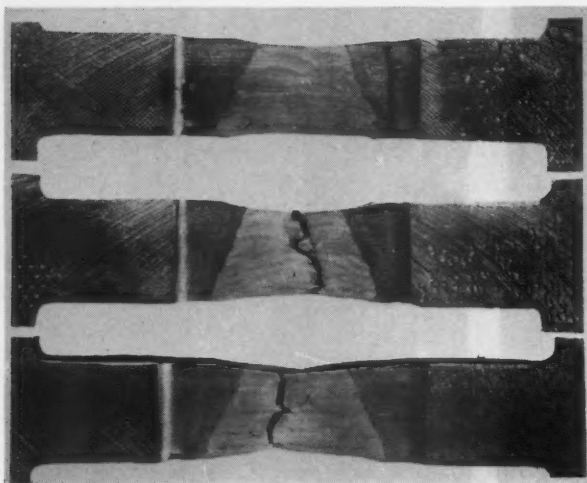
TENSILE SPECIMEN MACHINED SO MINIMUM SECTION IS AT CENTER OF WELD. RUPTURING STRESS OF WELD METAL 70,000 TO 75,000 LBS. PER SQ. IN.
